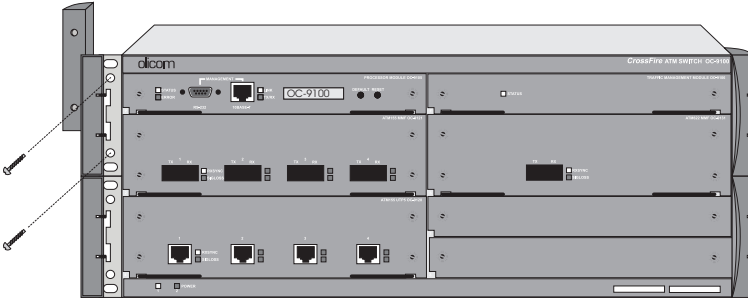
Removing the Bracket Covers to Expose the Rack Mounting Bracket
